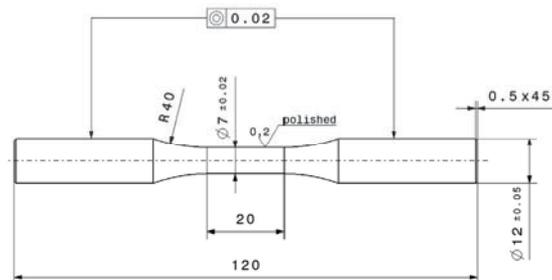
Specimen geometry used for low cycle fatigue tests
